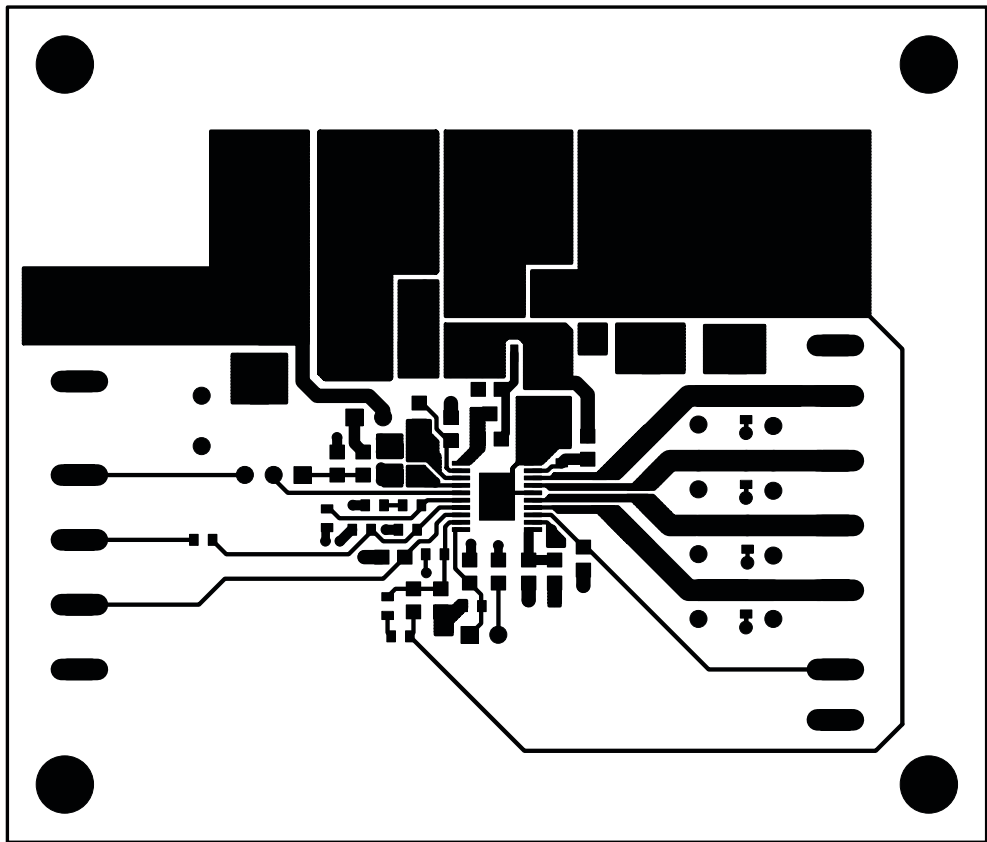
MAX16814 EV Kit PCB Layout—Component Side
